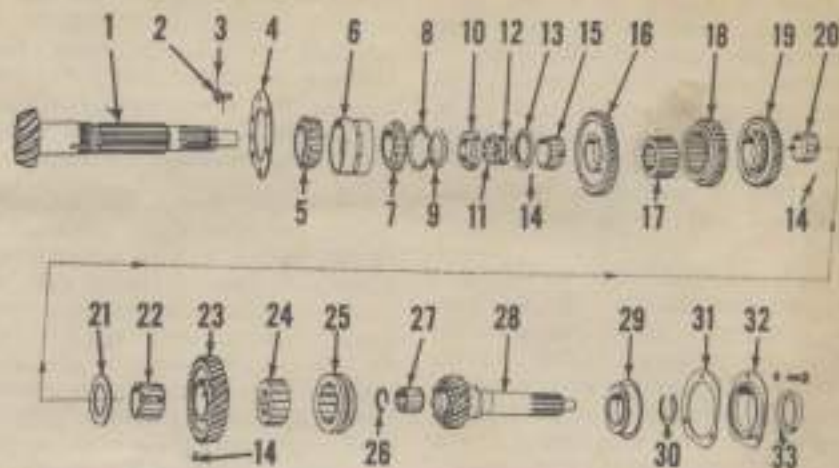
Exploded view of the D-17 transmission main drive (input) shaft (28), bevel pinion shaft (1) and associated parts.
